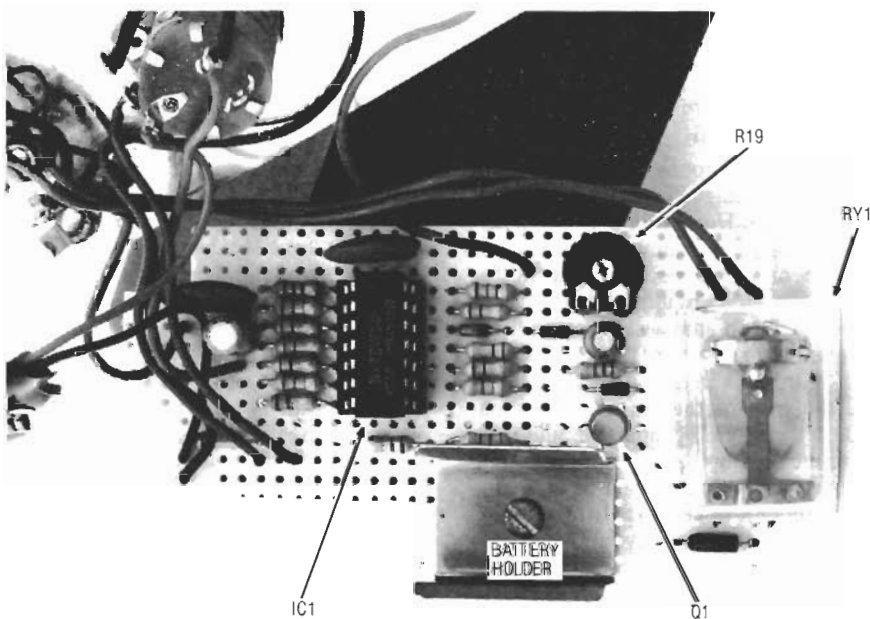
MOST OF THE CIRCUIT can be mounted on a small piece of perforated construction board.
